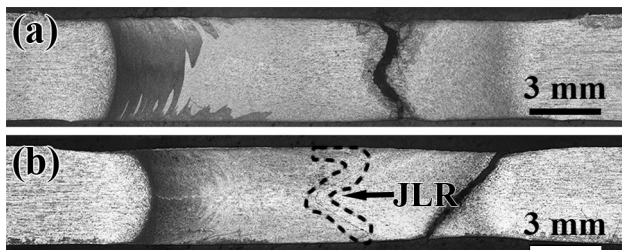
Tensile fracture locations of BT-FSW joints under welding speeds of a 200 mm/min, b 400 mm/min
